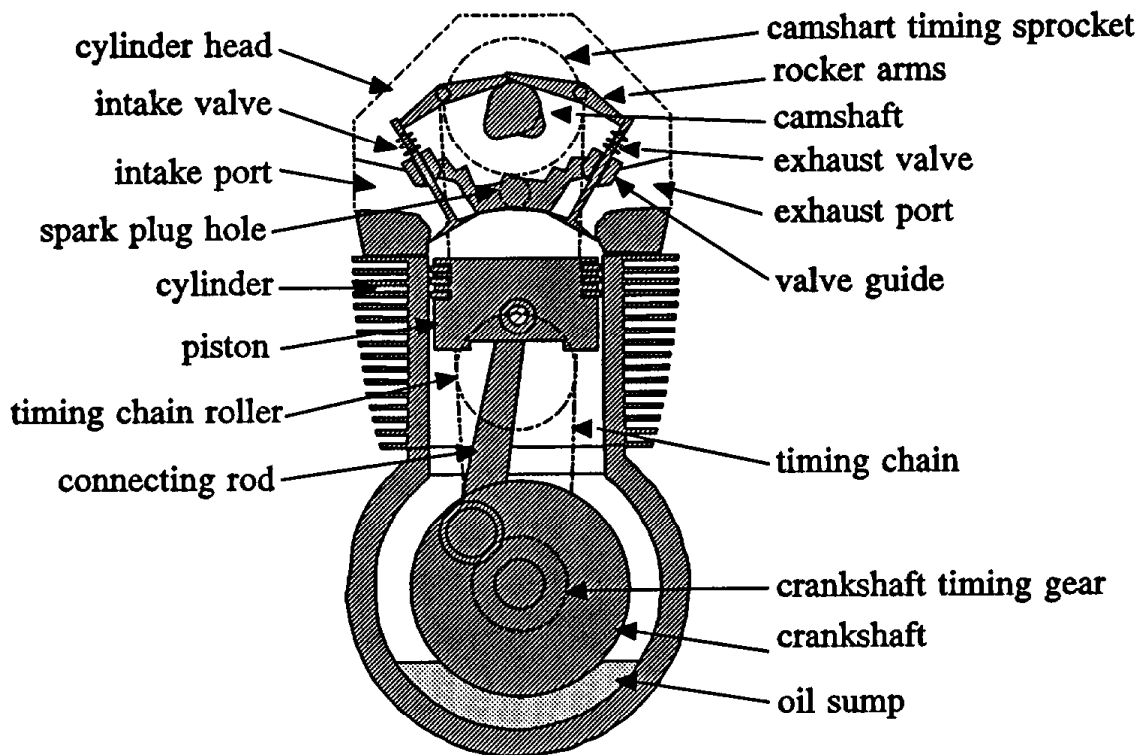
Mechanical layout of a typical overhead valve, four-stroke engine.
